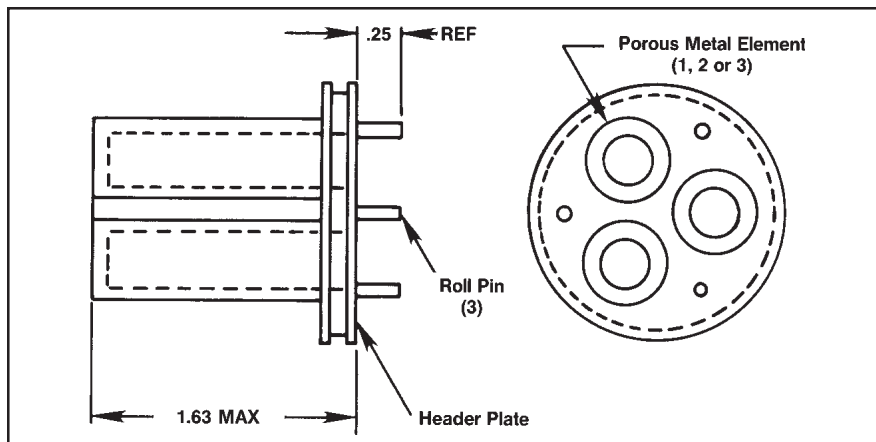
Model Mf51/61 Restrictor Element Assembly
